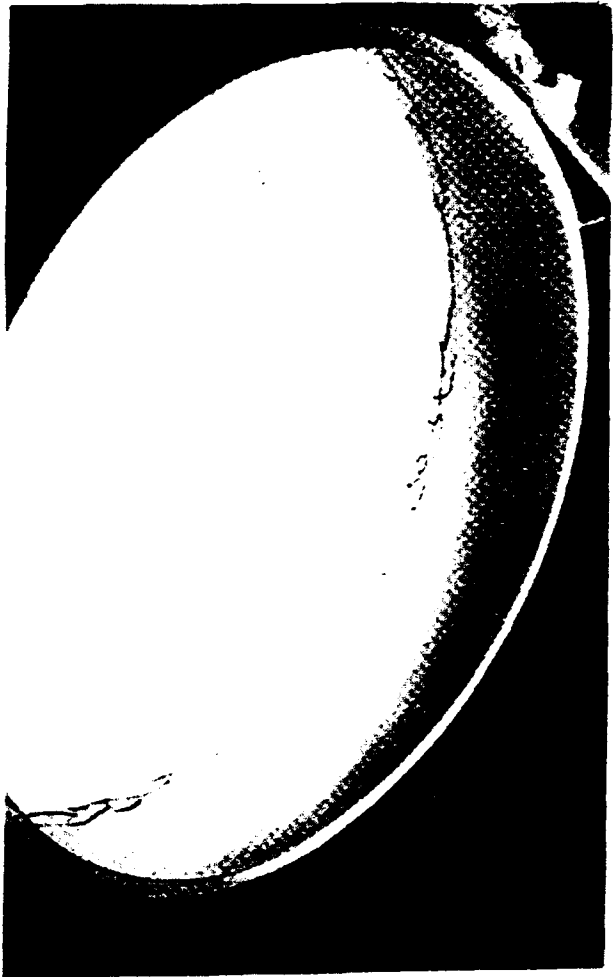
TEST RV-7, CONTINUOUS GIRTH CRACKS HIGHLIGHTED
